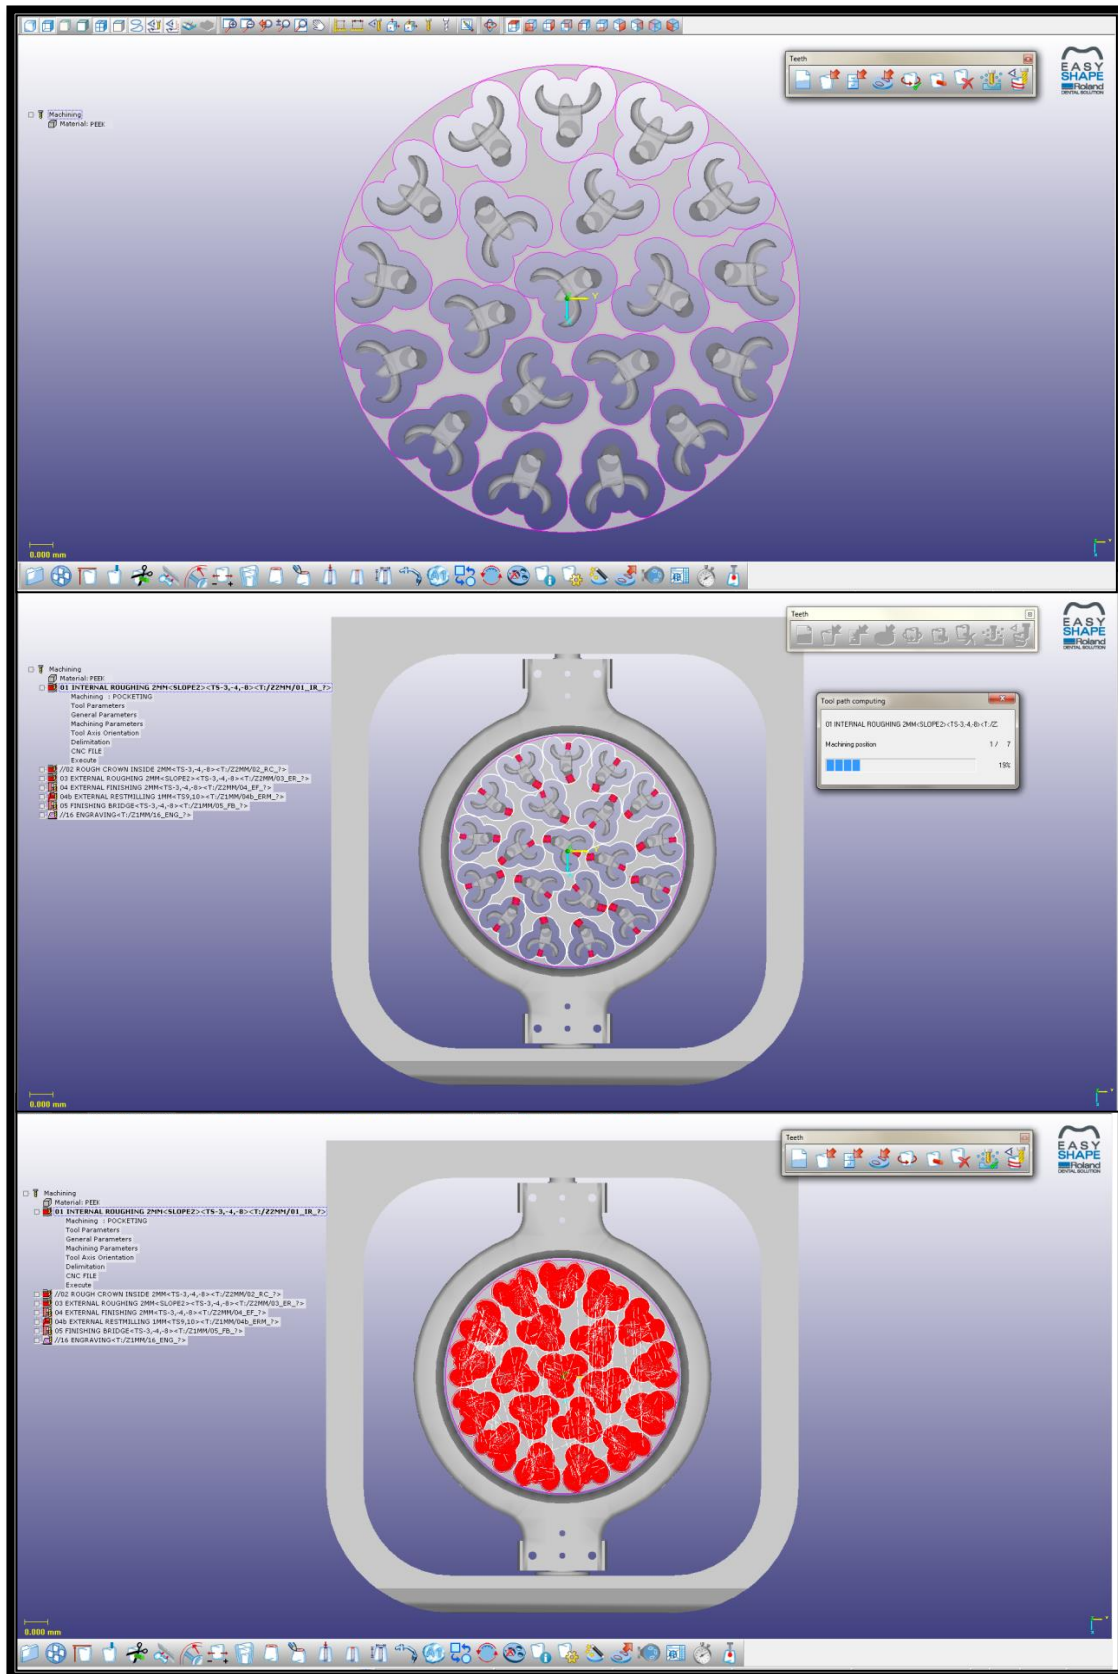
Clasps sample arranged for milling into PEEK using Roland CAD/CAM machine
